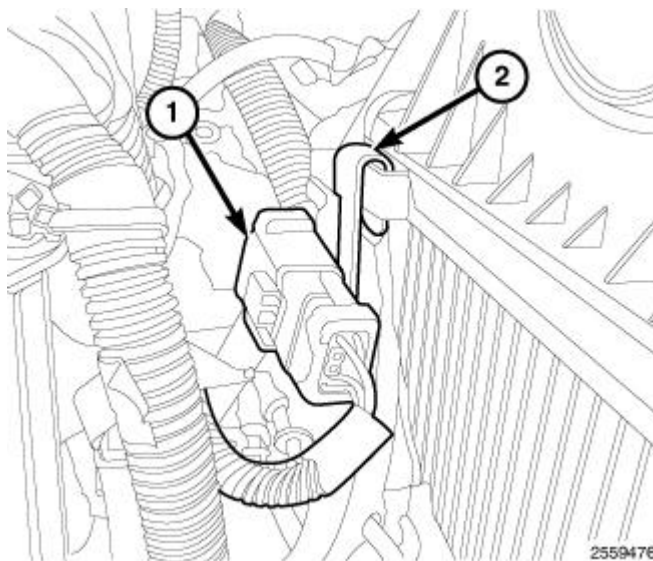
Identifying Starter Cable Support Bracket & Harness Connector
